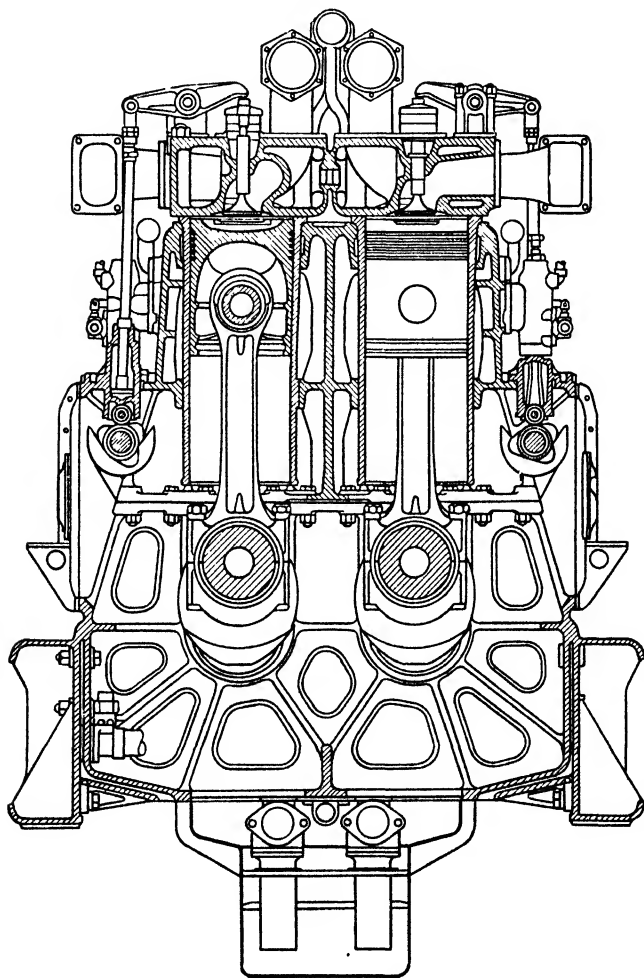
SULZER TWIN-TYPE LOCOMOTIVE ENGINE OF 2200 HP AT 700 RPM.
